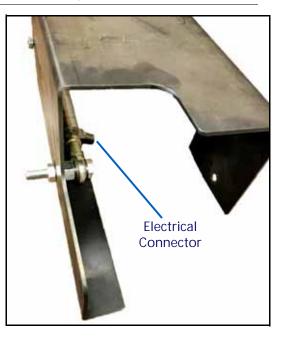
Cylinder End of the Wheel Angle Sensor Mounted
